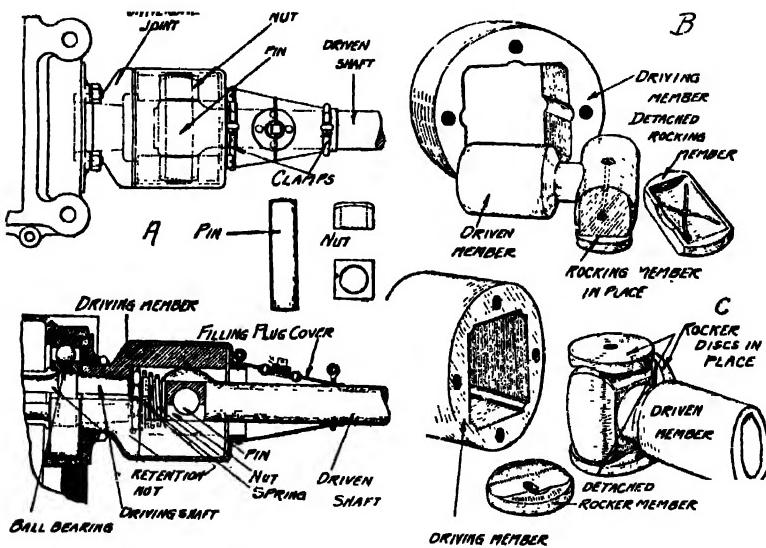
Construction of the Sliding Block Pattern Universal Joint.
